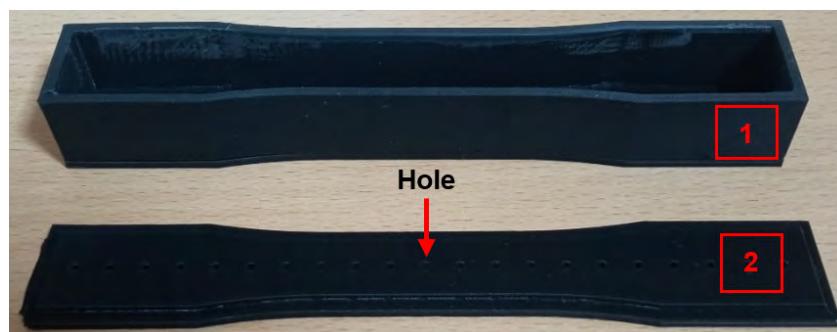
Realized two-part mould for the biocomposite specimens manufacturing
